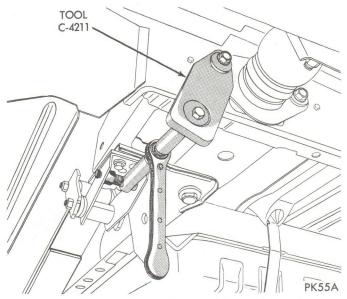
Spring Stretcher Tool in Position for Removing Rear Spring (Carline C)
